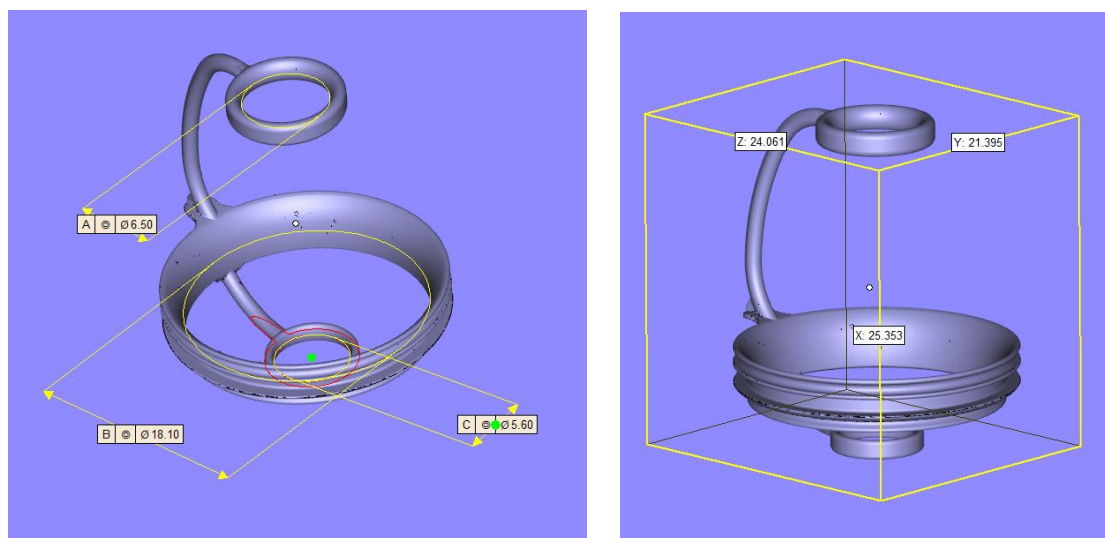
CAD renderings of the Glycar valve housing assembly
